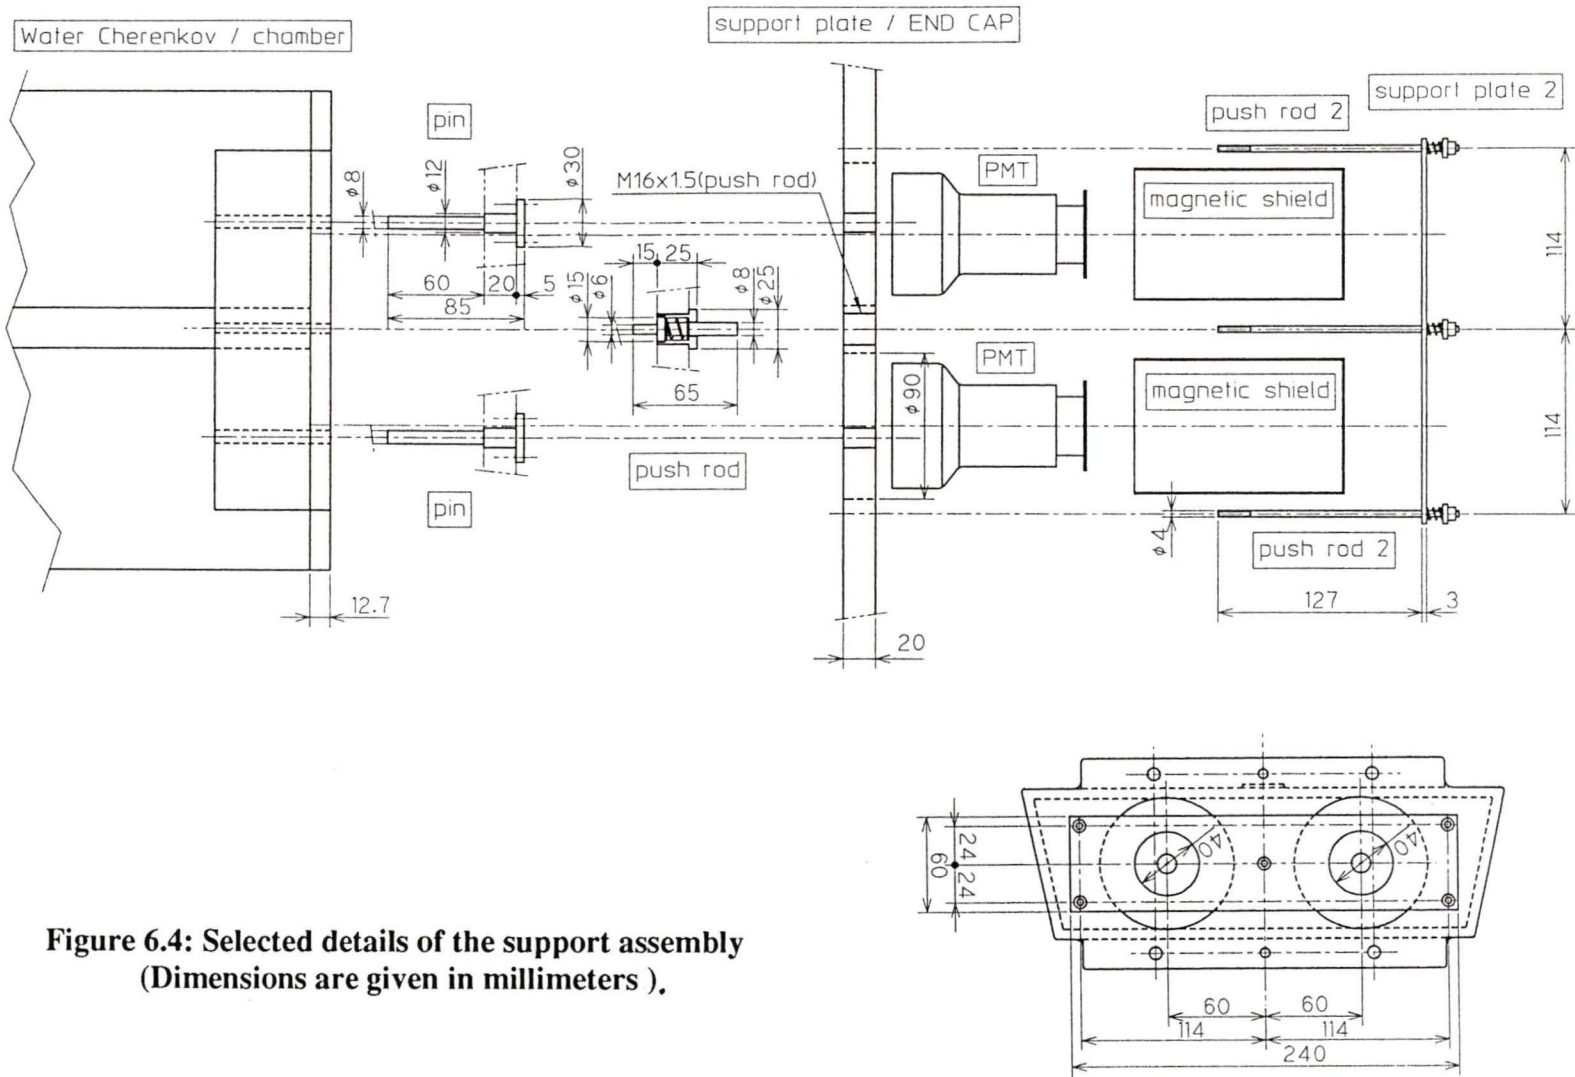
Selected details of the support assembly (Dimensions are given in millimeters).
